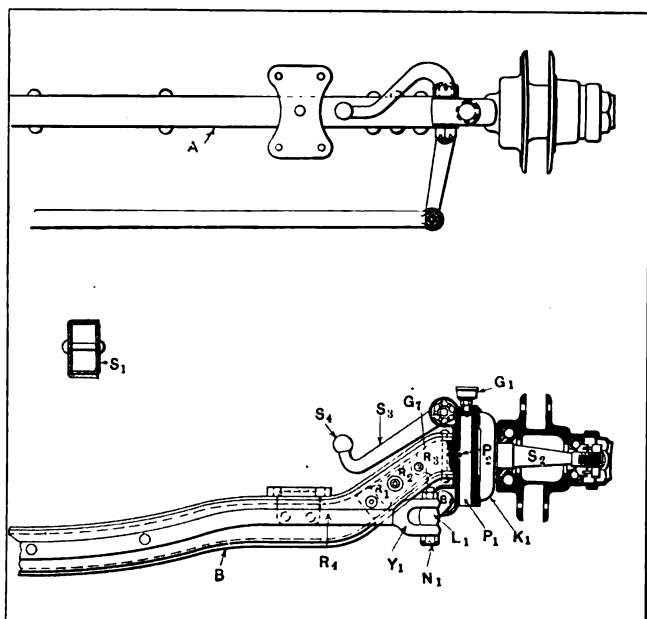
Plan and section of A. O. Smith type of pressed-steel front axle using cup-and-cone ball bearings
